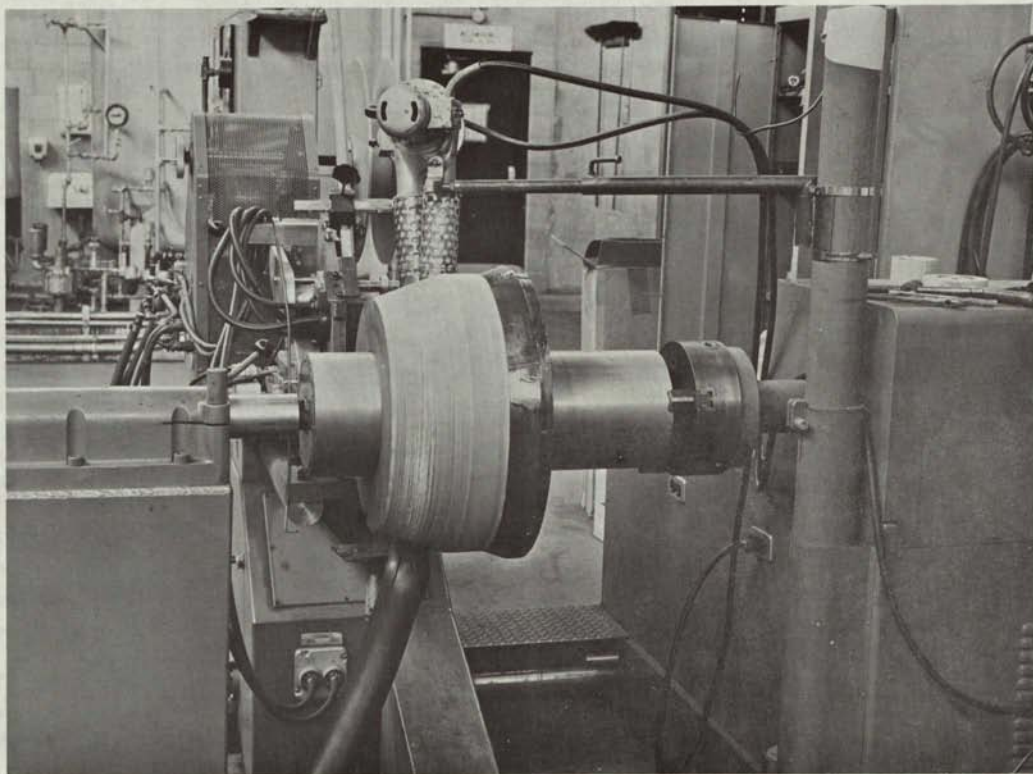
Nozzle No. 2 Tape Wrapping Segments (View A)
